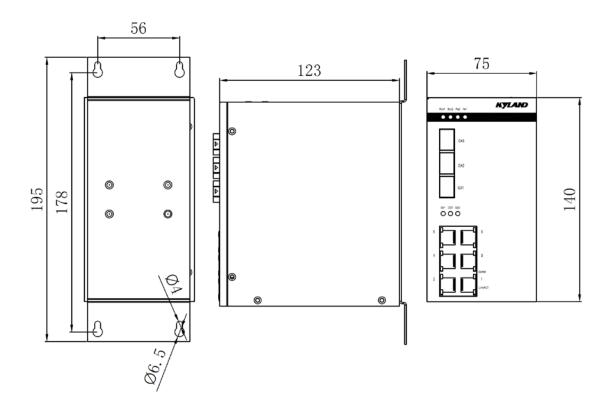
Dimensions for SICOM3000BA (integrated device, panel mounting)
